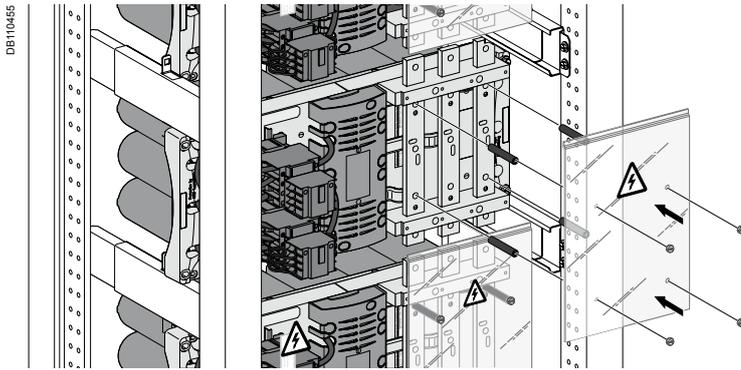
assembly details for fitting the protection barrier for modules with busbar.
